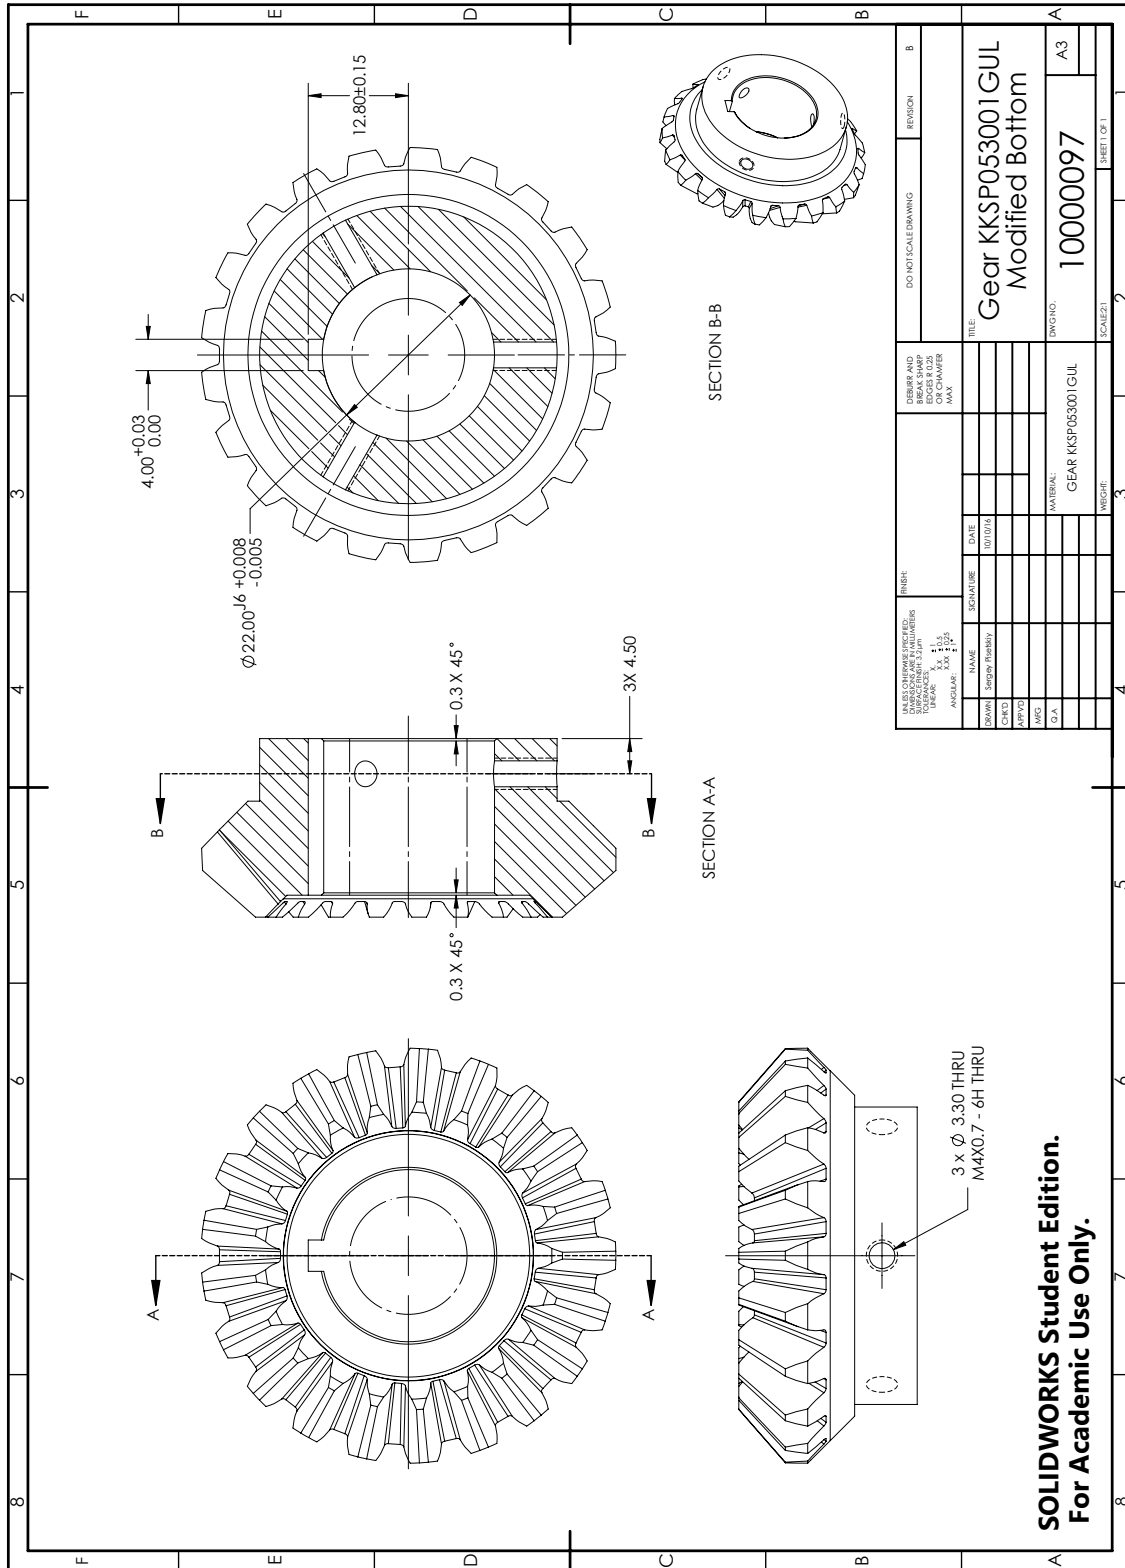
Drawing: Gear KKSP053001GUL modified, bottom.
